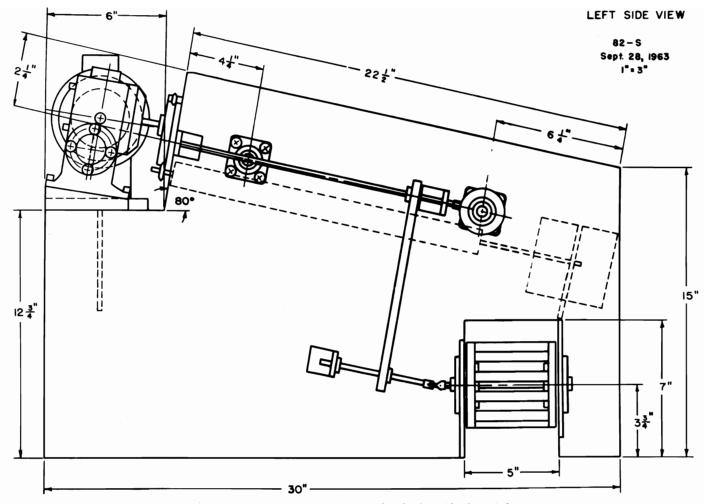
Dimensional drawing of mechanical poha berry husker. Side view.
